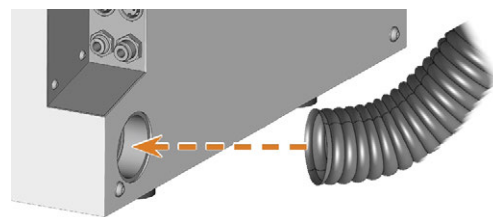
INSERTING THE SUCTION HOSE INTO THE MACHINE
